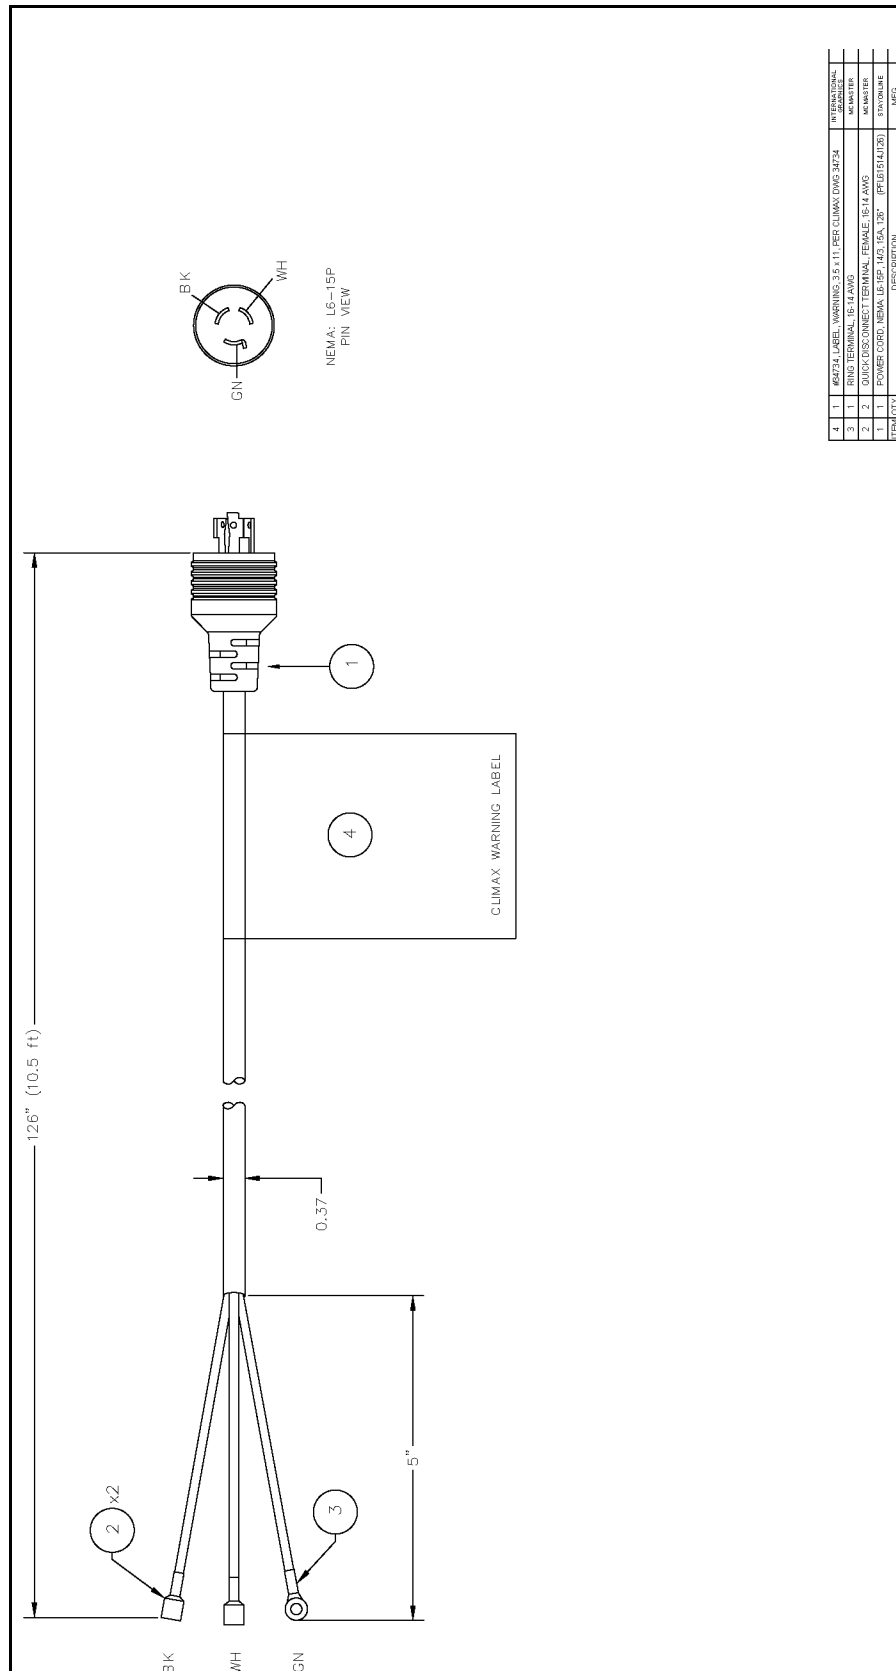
BB5000 EIBENSTOCK POWER CABLE ASSEMBLY 2ND GEN 230V DOMESTIC L6-15P PLUG (P/N 88655 E00175)
